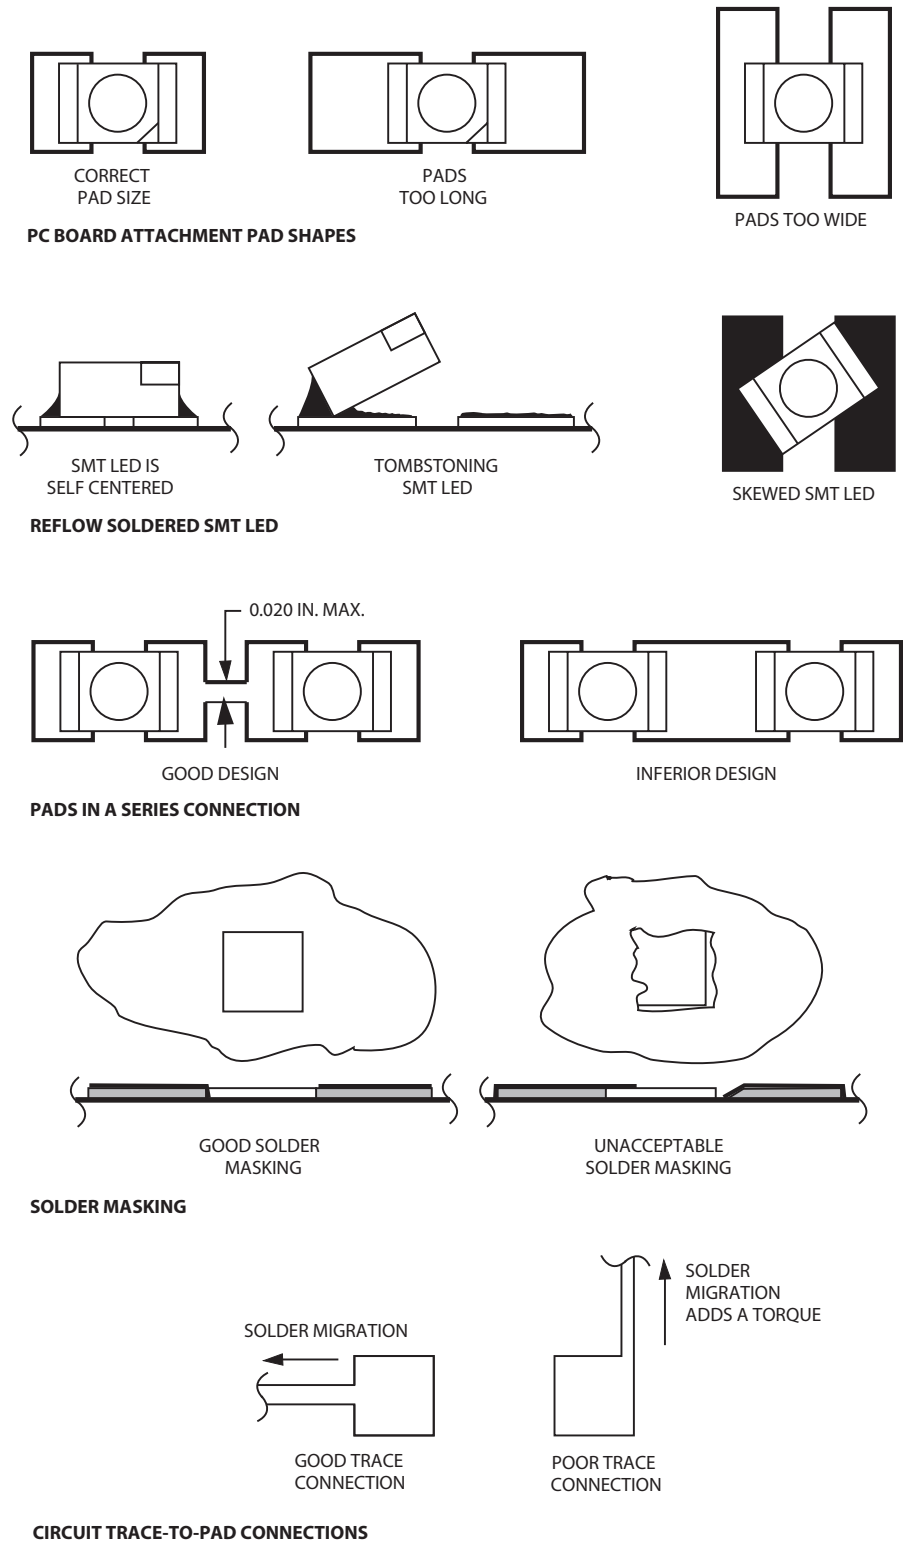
PCB Land Pattern Design Consideration for SMT LED Components, Pad Dimensions Should Not Exceed 0.20 mm (0.008 in.) of the Recommended Size
